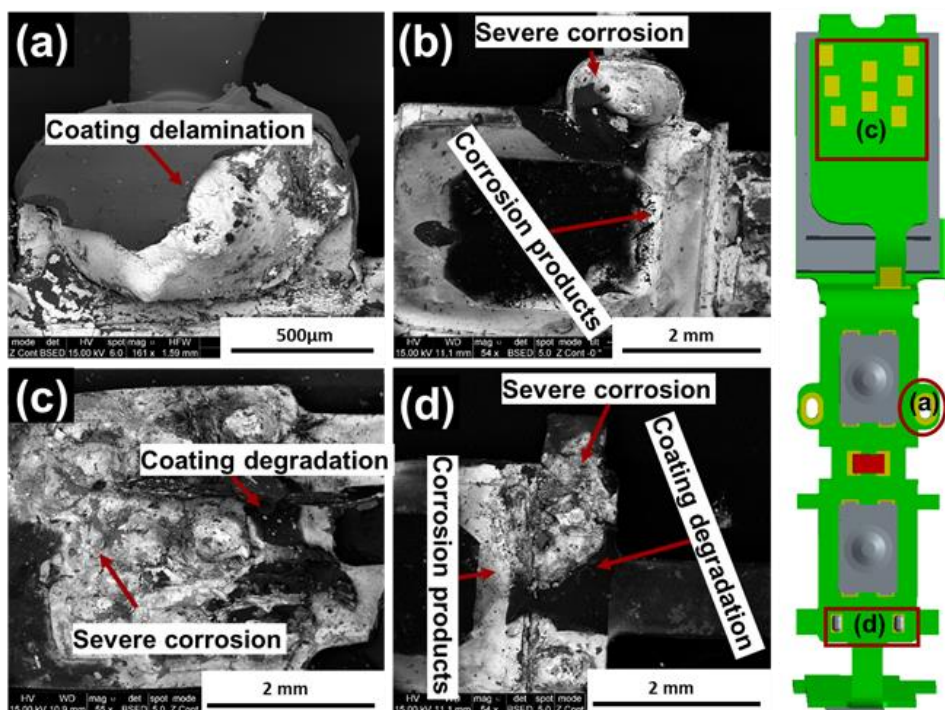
BSED SEM images showing: (a) Corrosion of battery contact soldering, (b) Corrosion products on FPCB, (c) Corrosion of microphone soldering, and (d) corrosion of W-link coil soldering.
